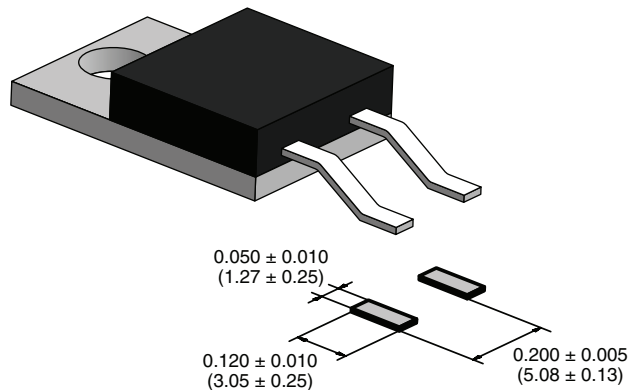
VPR220SZ FORMING DIMENSIONS in inches (millimeters)
